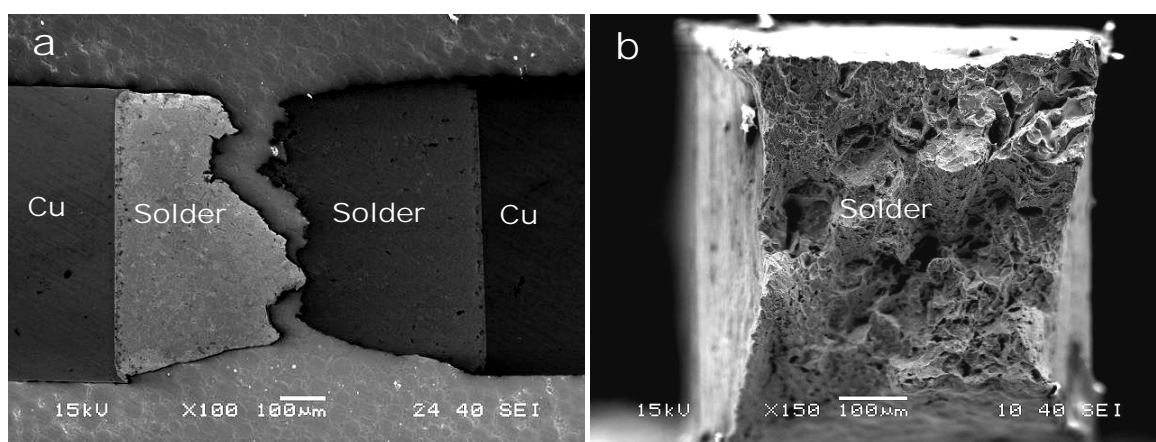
(a) Fracture path and (b) fracture surface of the as-prepared sample. The neck formation in the bulk solder indicates the ductile failure.
